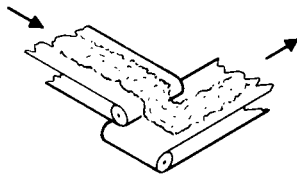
Simple intersection. Incoming conveyor section overlaps outgoing section and merely dumps material onto lower conveyor.
